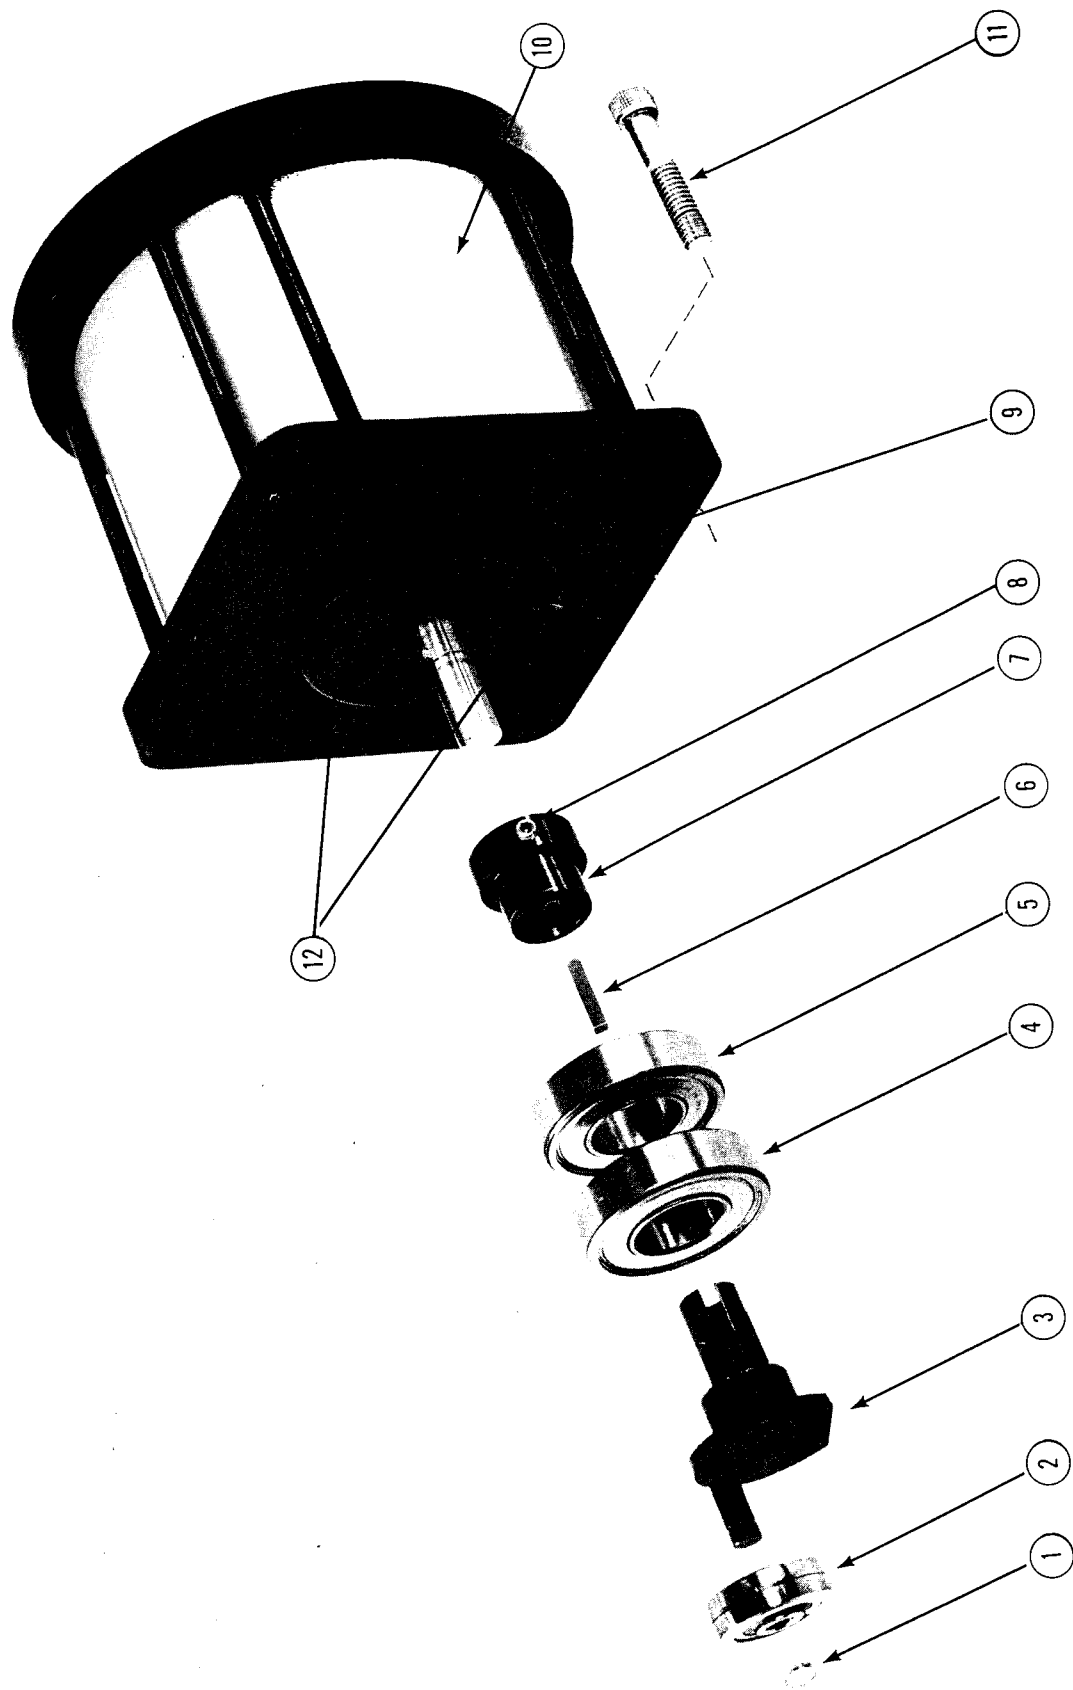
EXPLODED VIEW OF THE DRIVER MECHANISM
